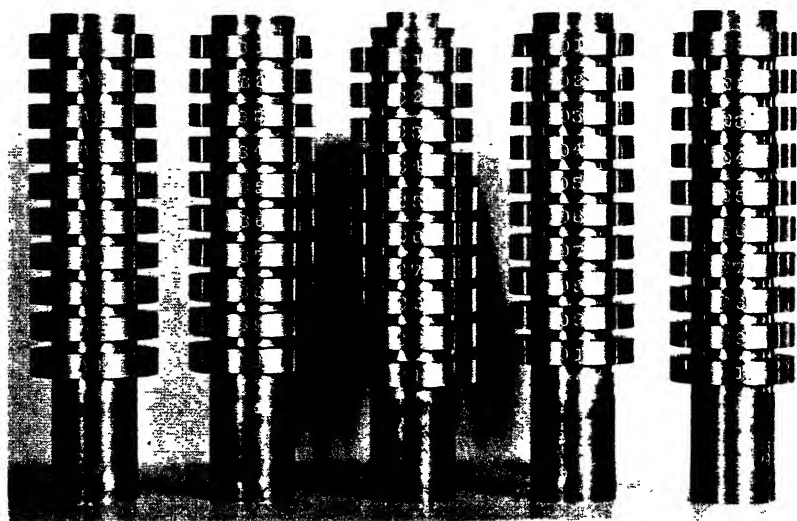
TEST SPECIMENS, SHOWING METHOD OF PREPARING THEM.
